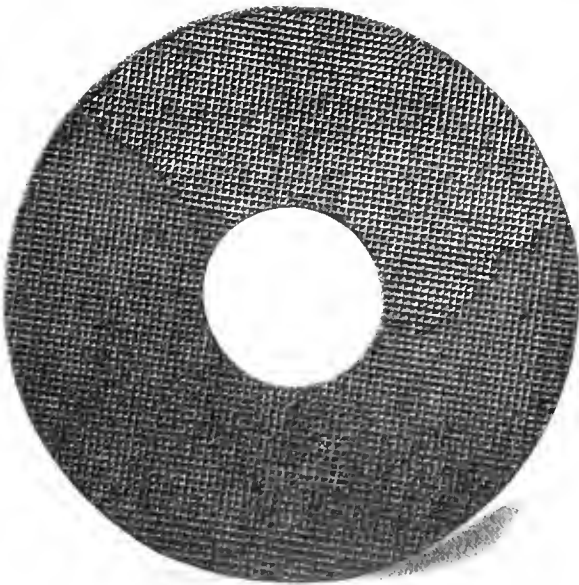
Same Type of Grinding Disk as shown in Fig. 6, but with Finer Abrasive.
